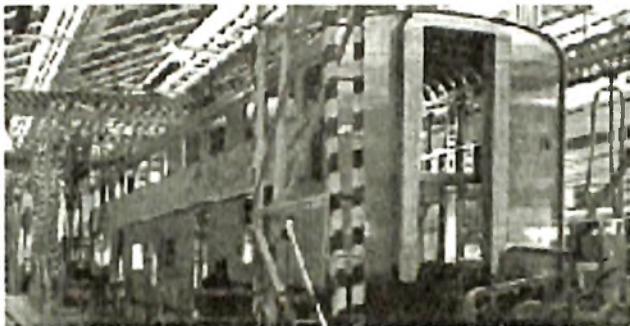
Double Deck Passenger Car Welded using 14.06/14.12
